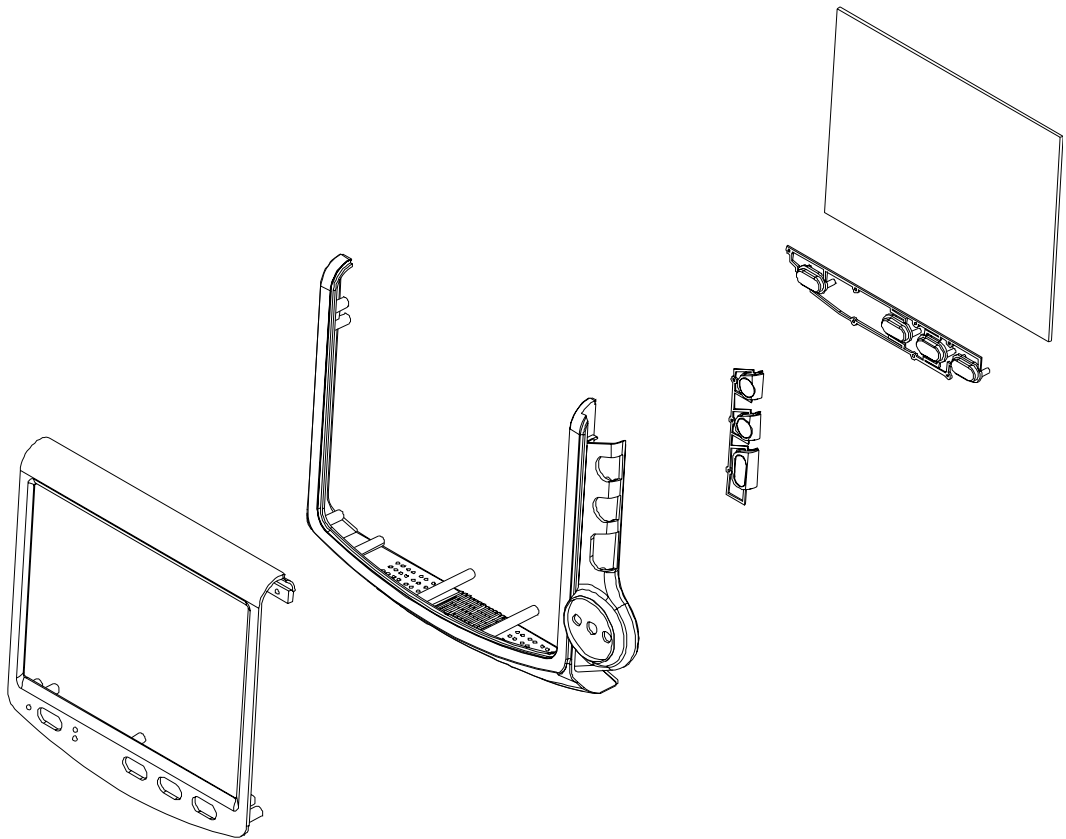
Front Case Disassembly – Bezel, LCD Window, Front Key Array, Side Key Array
